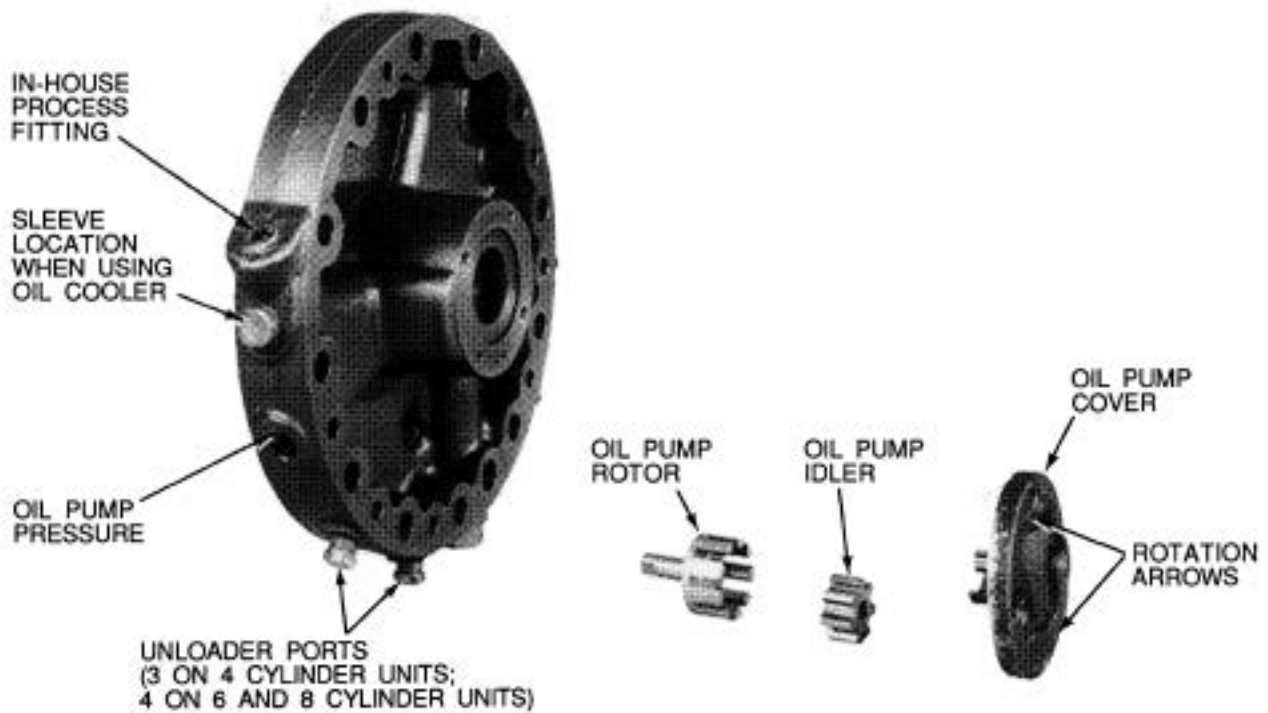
5H40 through 86 Oil Pump Assembly
